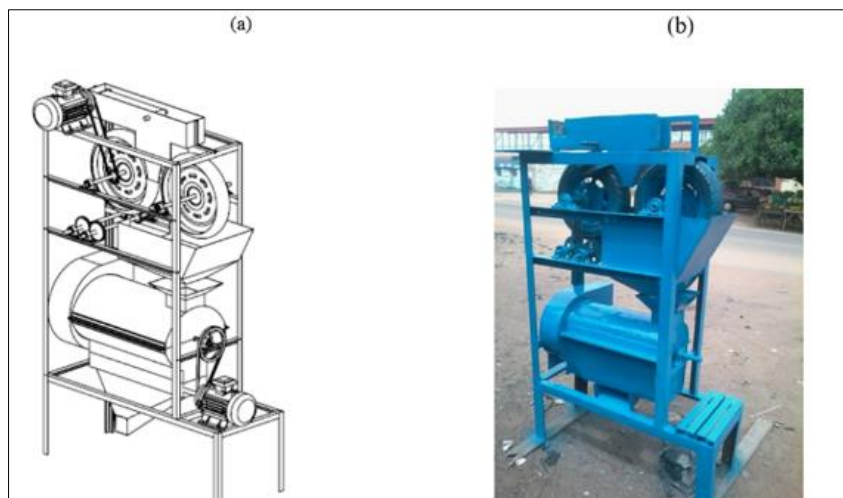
(a) An isomeric drawing of the cocoa seeds extracting machine (b): The actual cocoa seeds extracting machine
